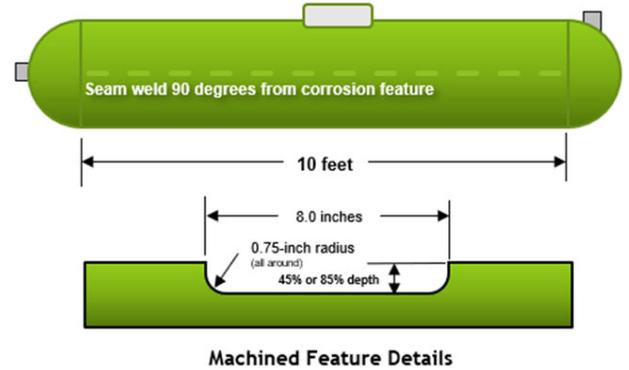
Schematic Showing Machined Corrosion Location
